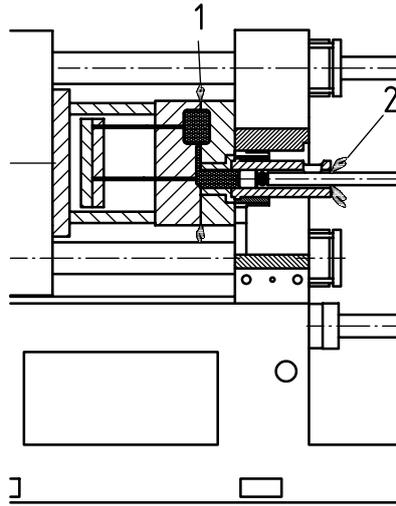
Example of a horizontal cold-chamber die casting machine with a toggle free die closing system
